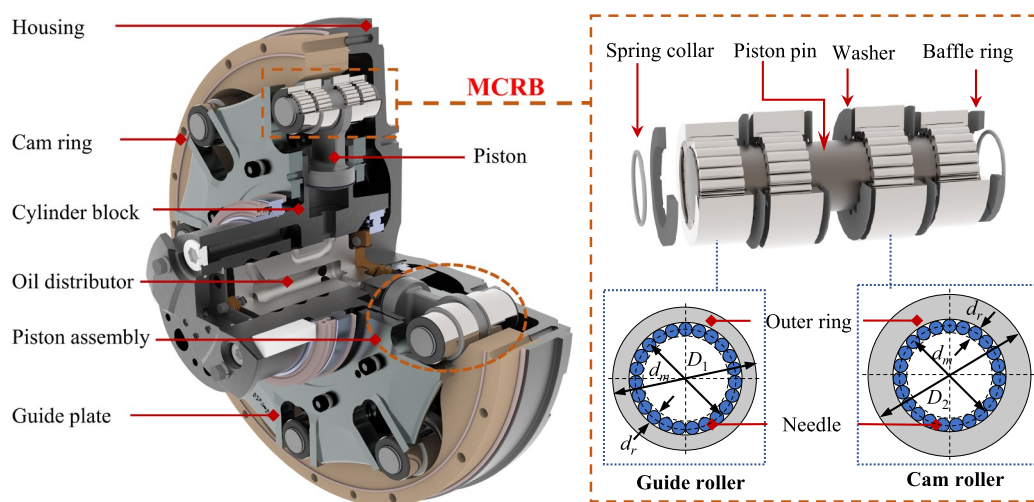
Structure diagram of cam-lobe radial-piston hydraulic motor and MCRB
